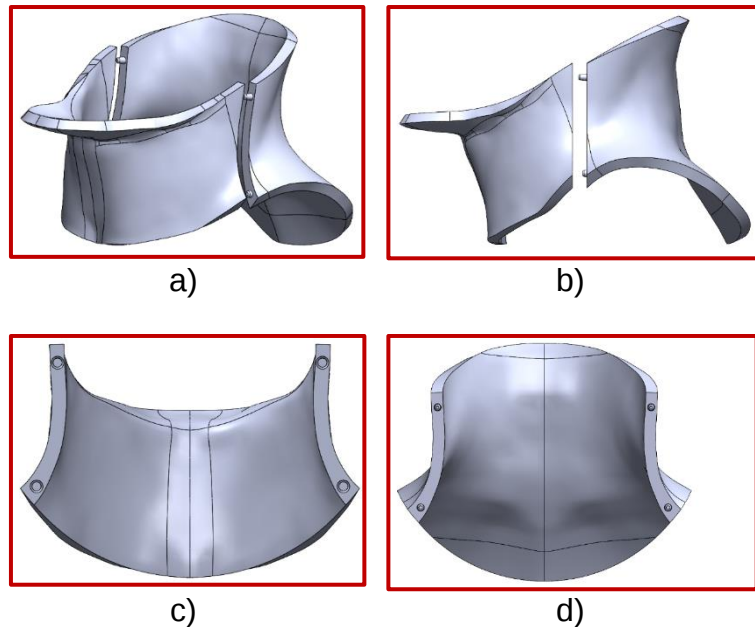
Multiple Figure of the initially guide system created: a) Overall view of the collar with the guide system; b) Lateral View of the collar with guide system; c) Back View of the Front Part of the collar; d) Front View of the Back Part of the collar.
